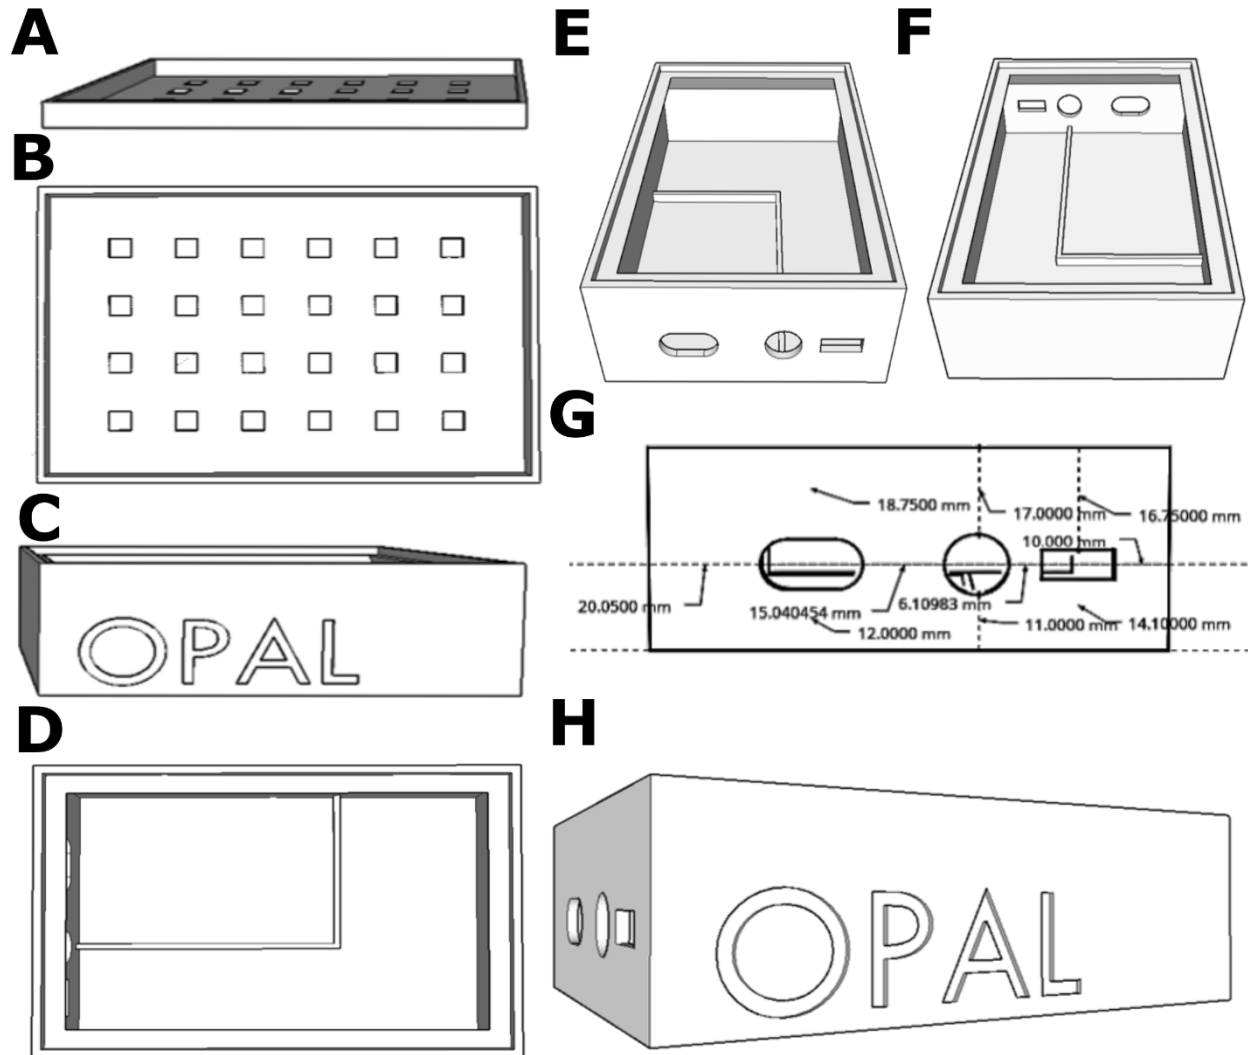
Three-dimensional rendering of the OPAL housing and the LED grid platform. (A) side view of platform; (B) top view of platform exposing LED ports; (C) side view of the lower housing chamber; (D) top view of the lower housing chamber, breadboard partition, and platform support rail; (E) orientation of the access port with respect to breadboard partition (F) reverse-orientation of the access port with respect to breadboard partition; (G) Positions and dimensions of the access ports, from left to right: microcontroller access port, 5V input jack port, USB-B port; dimensions are included in the .obj files; (H) orientation of the access port with respect to the OPAL inscription. All dimensions are included Table 1 as well as the .obj file. Renderings made in Google SketchUp.
